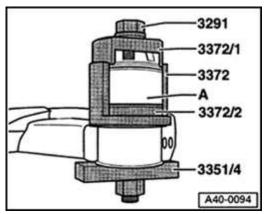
Pulling In Rear Bonded Rubber Mounting Courtesy of VOLKSWAGEN UNITED STATES, INC.
